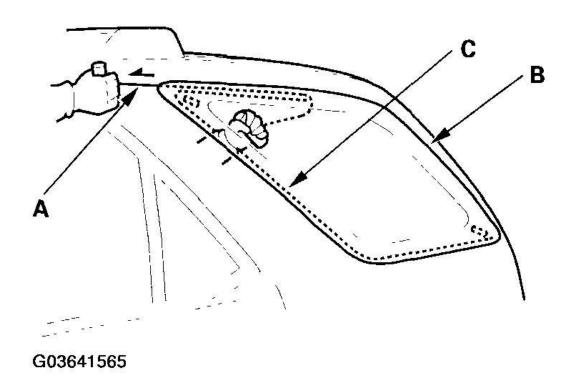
Cutting Positions Using Piano Wire (1 Of 2) Courtesy of AMERICAN HONDA MOTOR CO., INC.
